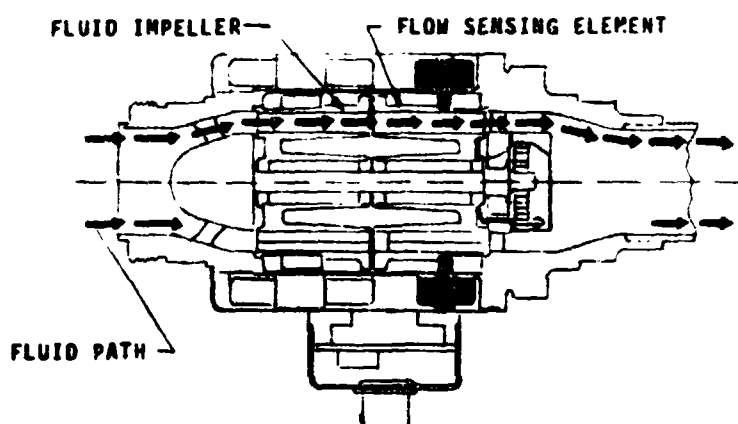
20 Cutaway View of the Mass Meter
